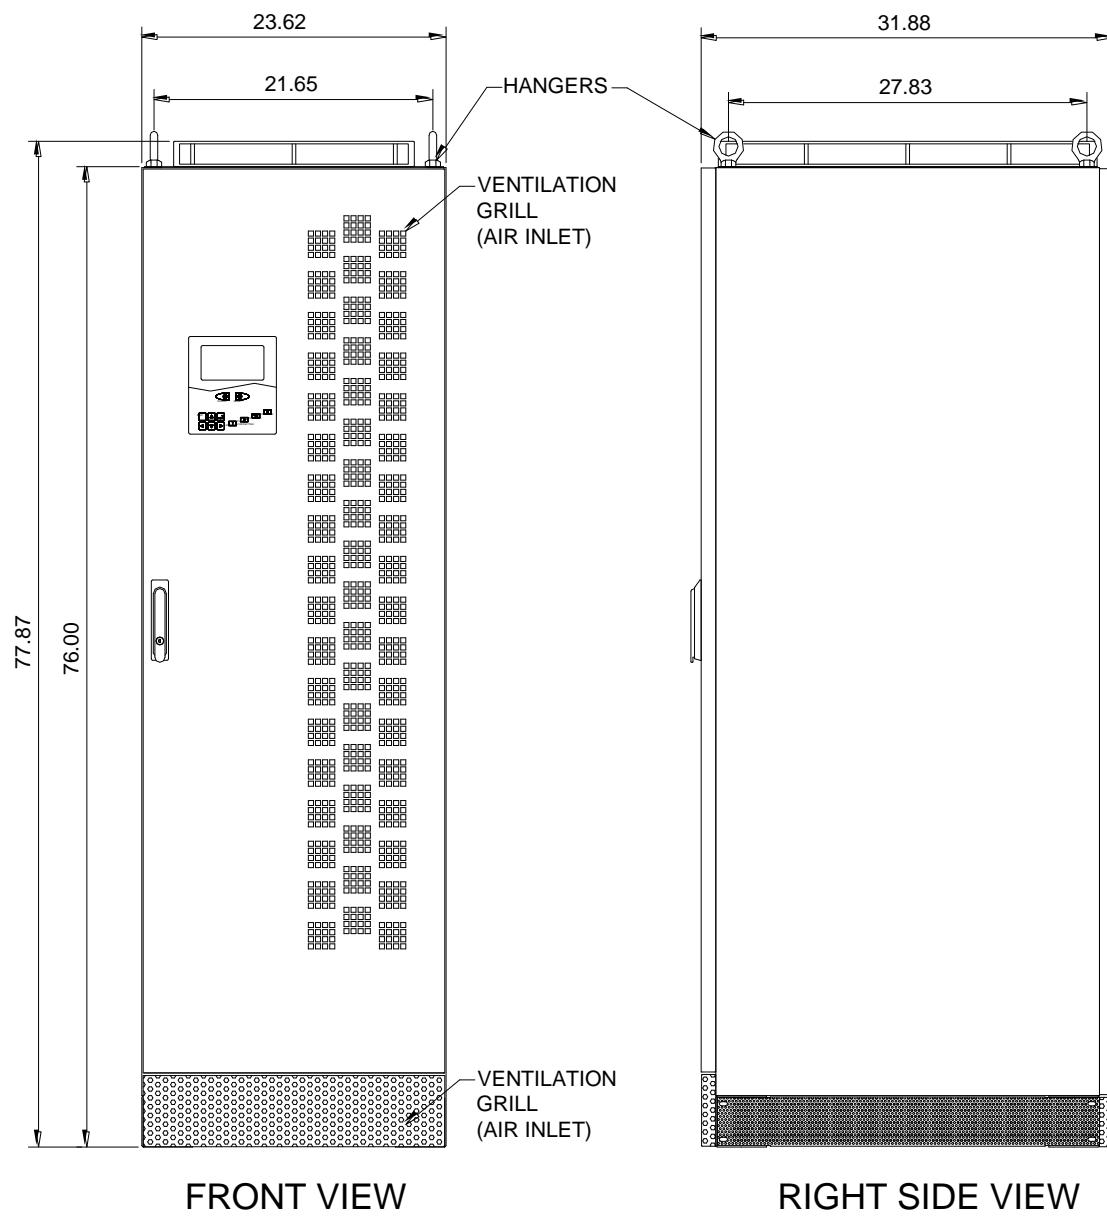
AF-0025 & AF-0050 with LCD Control & Display Panel
